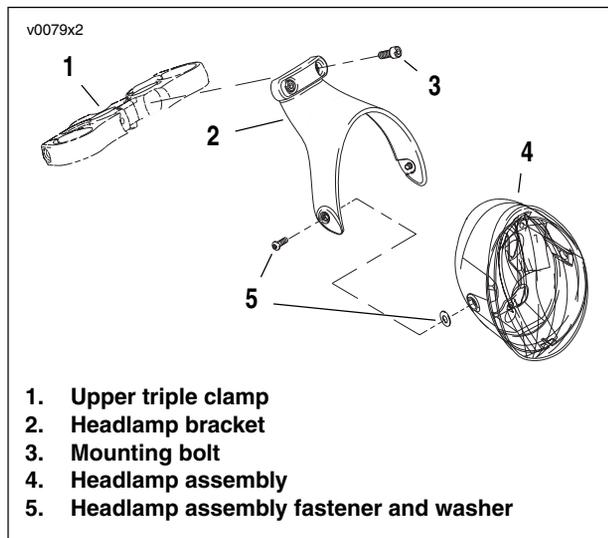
Headlamp Bracket and Headlamp Assembly
